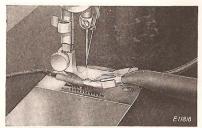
TUBULAR TRIMMING ATTACHMENT IN OPERATION
